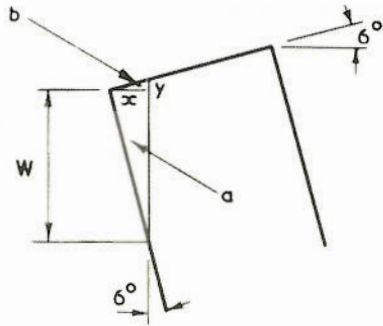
TRUE FLANK WEARLAND IN DIRECTION OF CUTTING.
